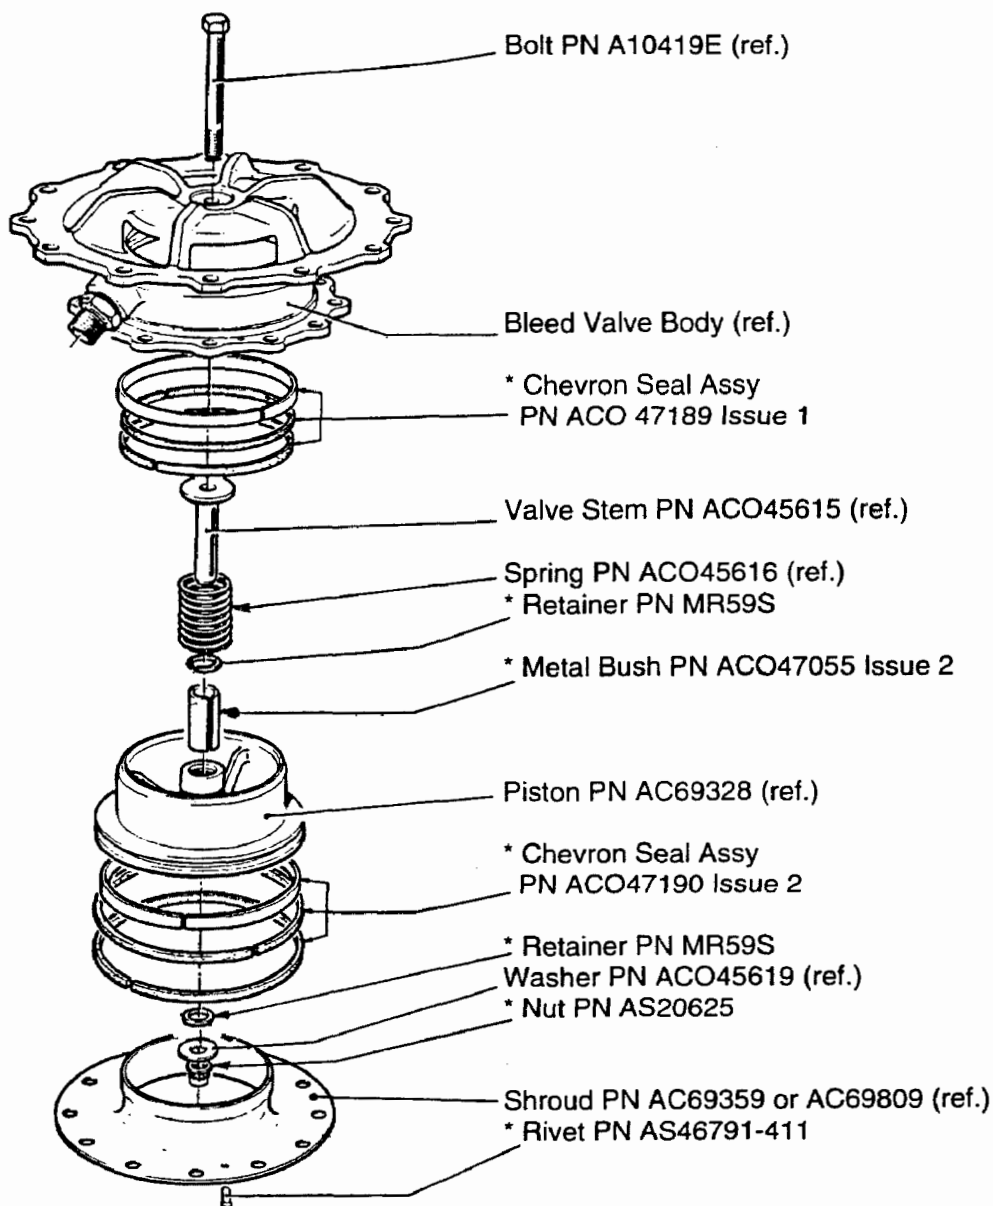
Exploded View of Bleed Valve P/N AC69922 Mod 2
